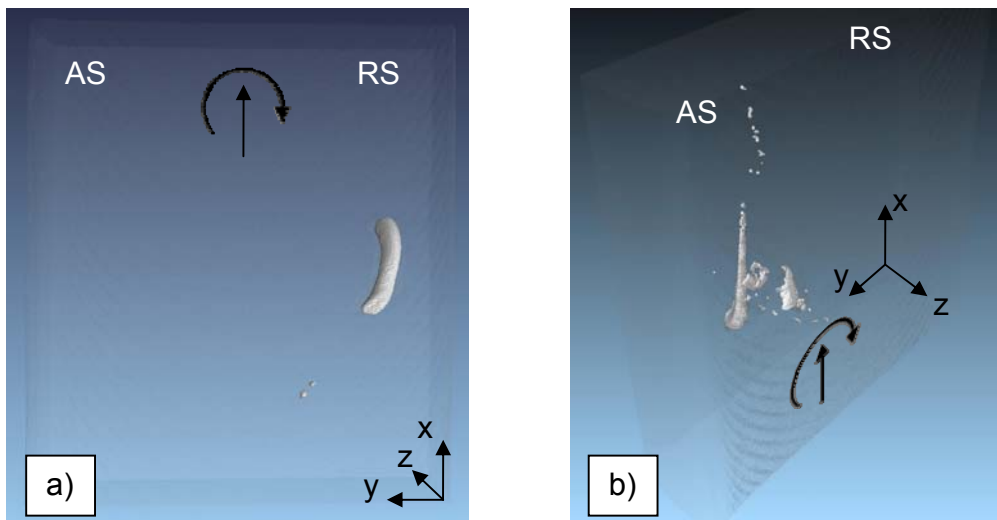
3D CT image of copper marker P001E a) and P001D b) after welding
